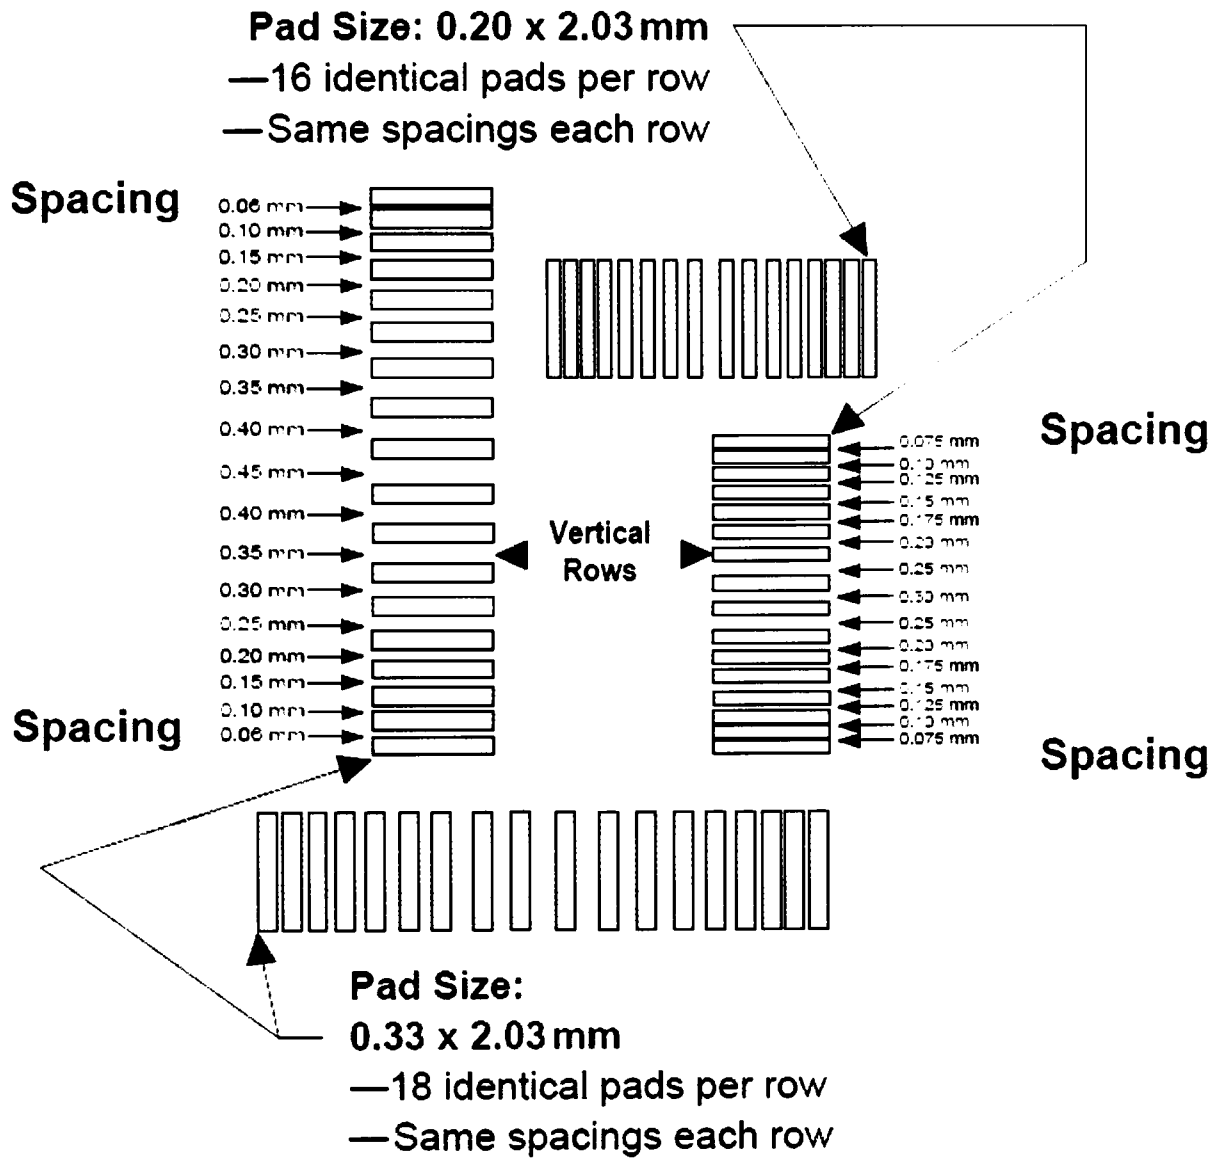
Engineering drawing of IPC TM 650-2.4.35 slump test pattern.
